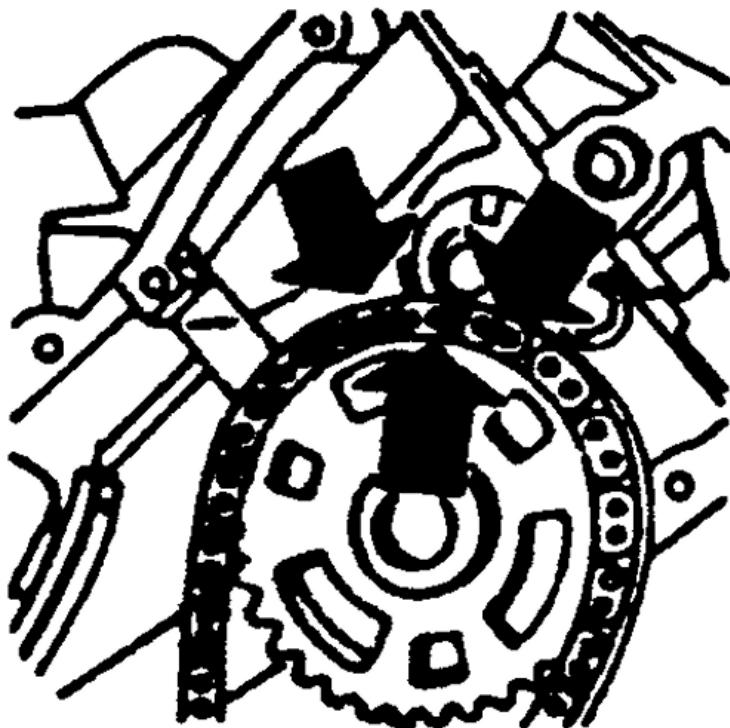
Exploded view of timing chain, tensioner and sprocket assembly
